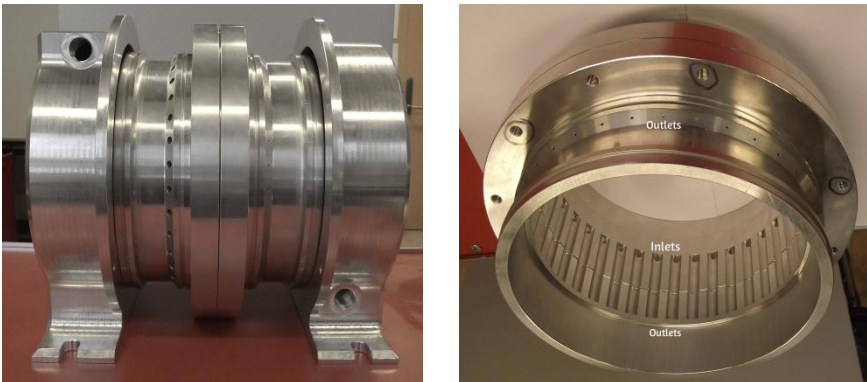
Pictures show the design of direct cooling system for the electrical machine
